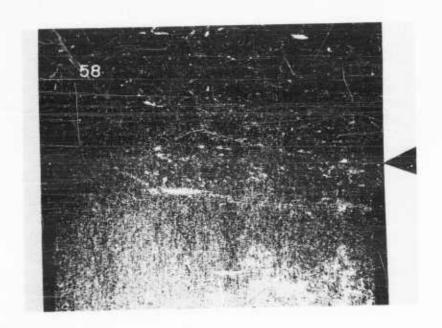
FAILURE IN SPECIMEN NO. 58
